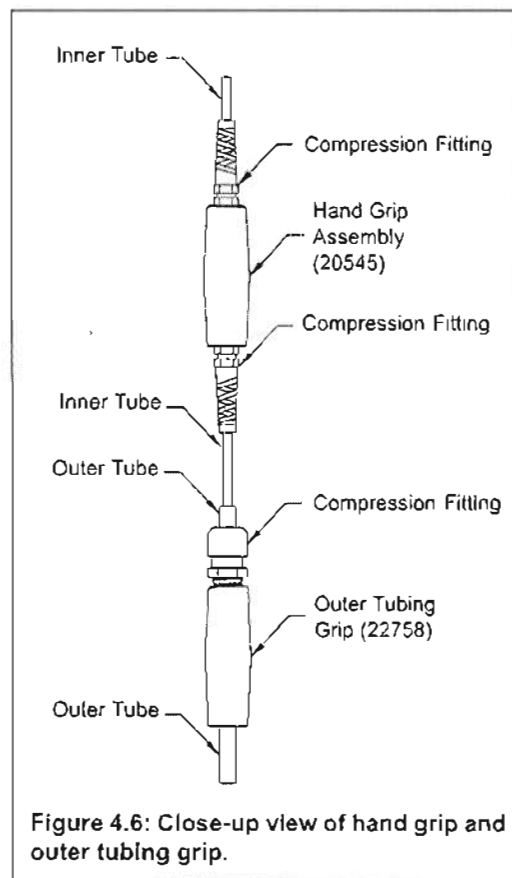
Close-up view of hand grip and outer tubing grip.
